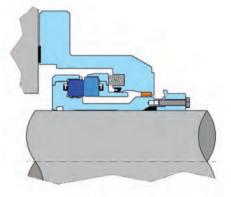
Cross-section view of steam turbine gland shows its non-rotating, flexing components sealed and centered by U-cup style high-temperature elastomers
